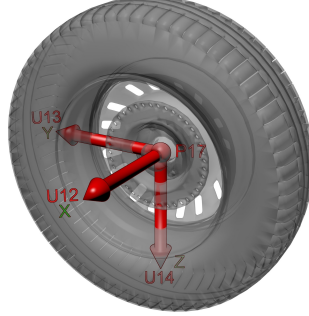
Points, vectors, COG, reference set of the front right wheel assembly
